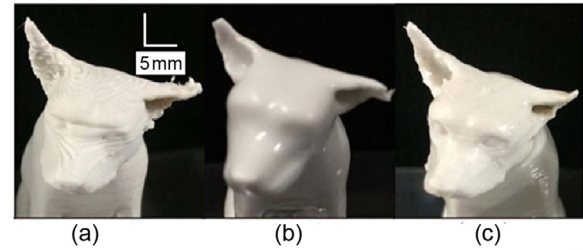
Dog 3D printing models: (a) without surface finishing, (b) with acetone vapor finishing, and (c) pen-style finishing [227].
